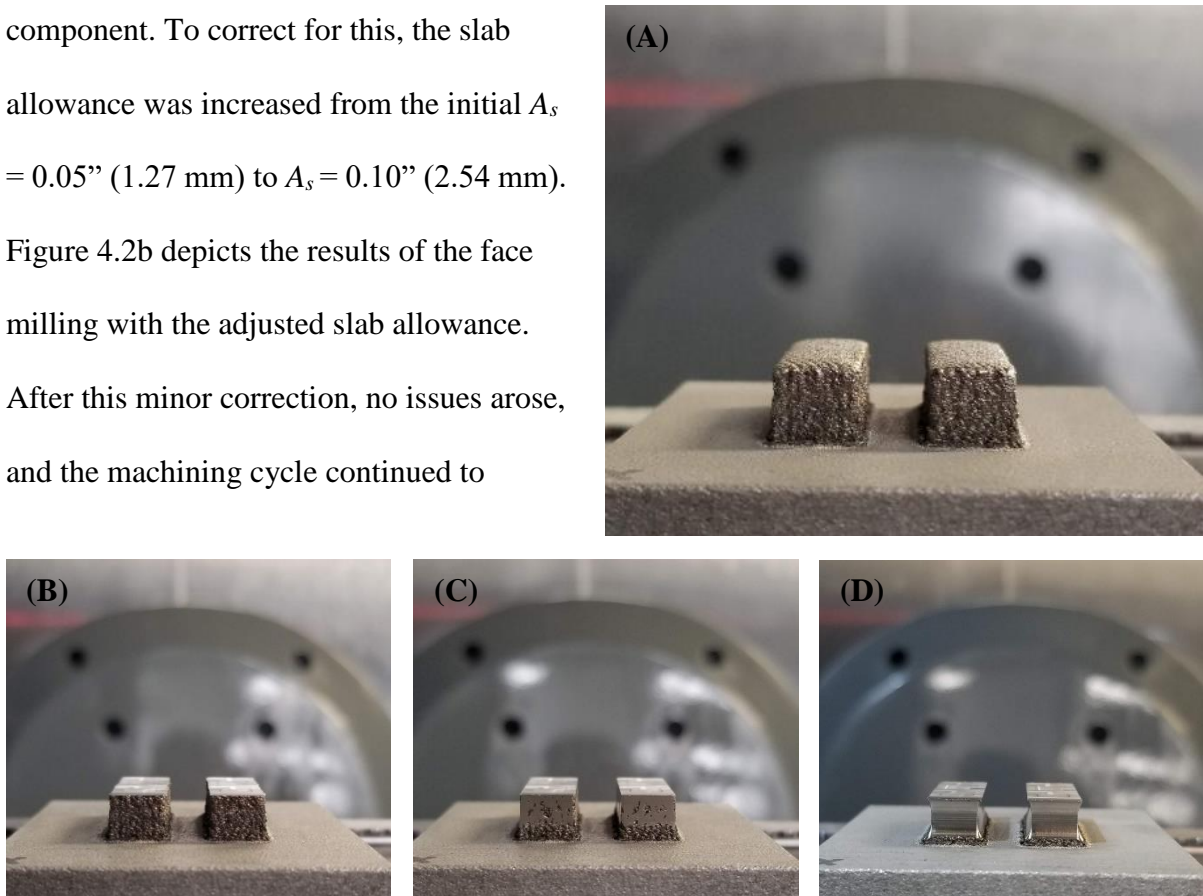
First deposition and machining cycle; (a) initial deposition, (b) results of face milling, (c) removal of excess material via ball end milling, (d) creation of ledge geometry
